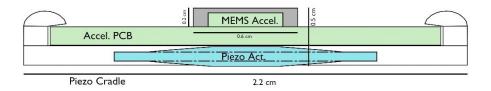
Piezo cradle design assembly with the piezo actuator and accelerometer board stacked together (front view).
